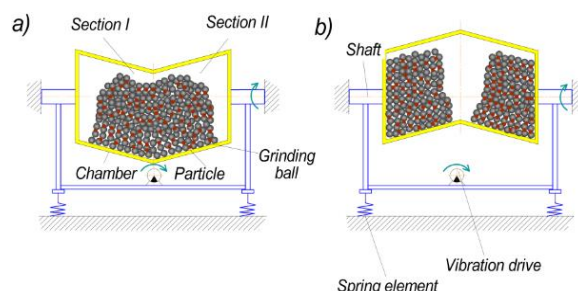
Schemes of the mill (grinder) design for implementing the new grinding (crushing) principle
